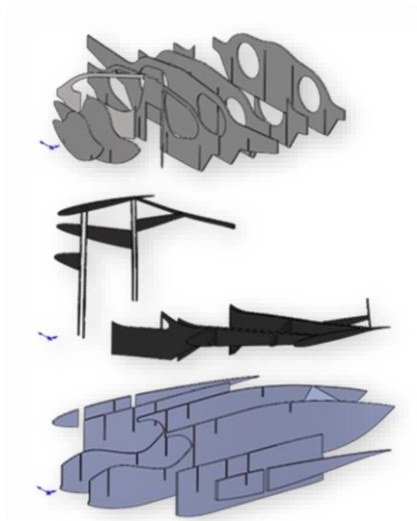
EXPLODED VIEW SHOWING INTERLOCKING BULKHEADS
